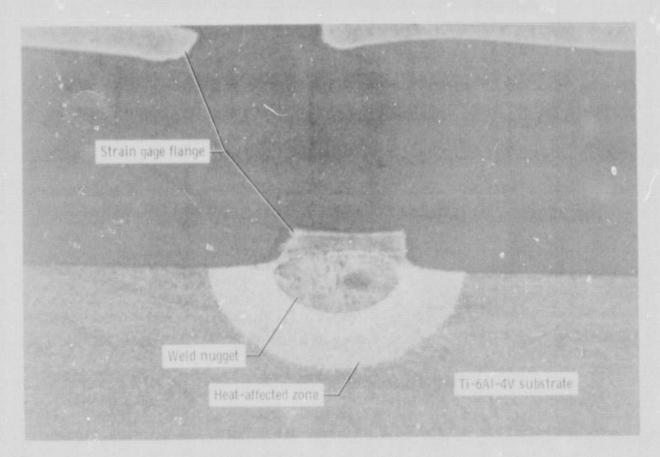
Photomicrograph of strain gage flange spot weld. Substrate is Ti-6Al-4V.
